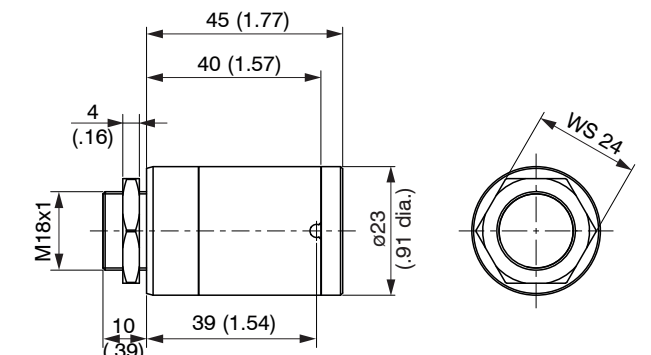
Dimensional drawing of massive housing, CTH and CTP models
